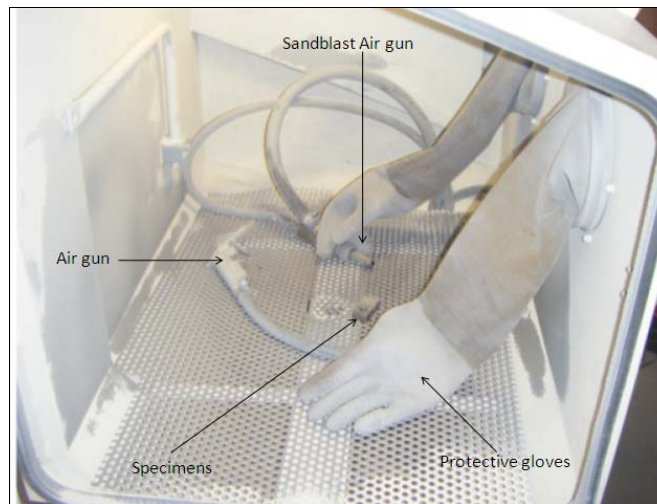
Specimens placement inside the sandblasting machine in Instituto de Engenharia Mecanica de Gestao Industrial INEGI.
